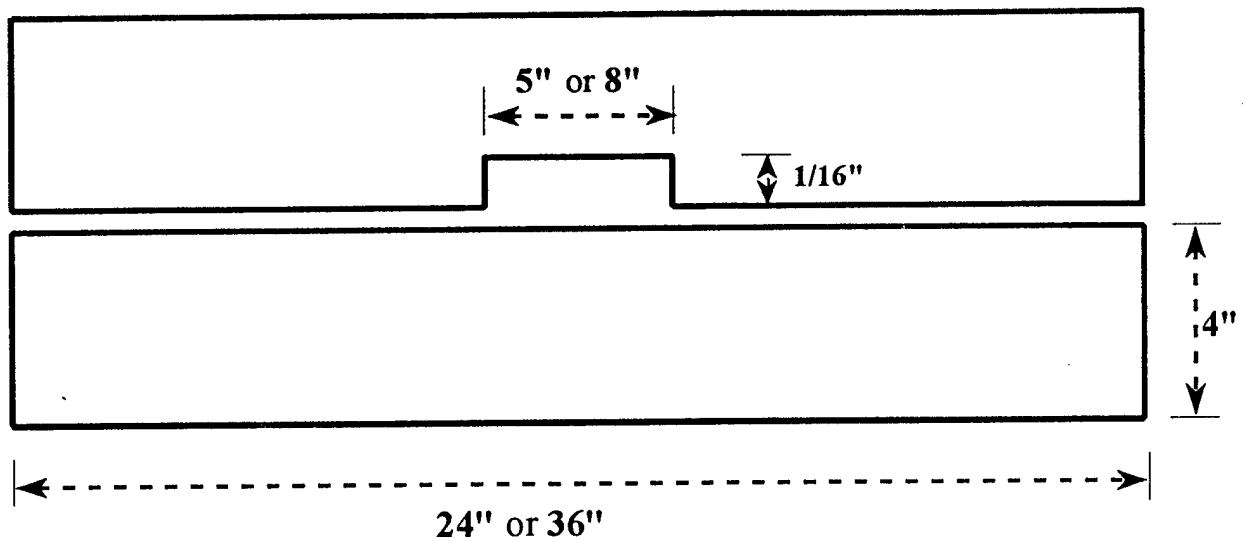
Schematic of the butt joint design with variable gap used for welding trials.
